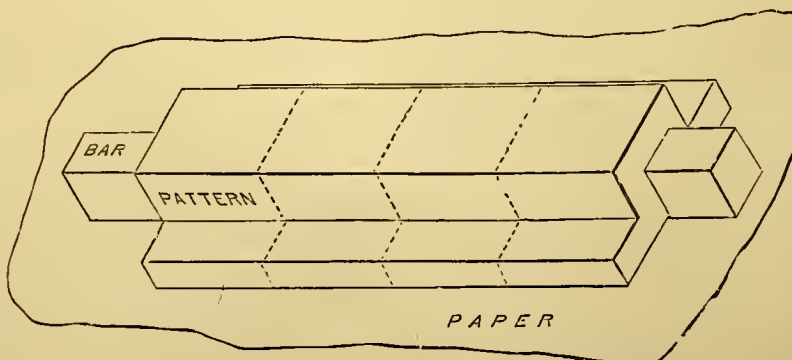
DIAGRAM SHOWING METHOD OF MAKING MOULD.
